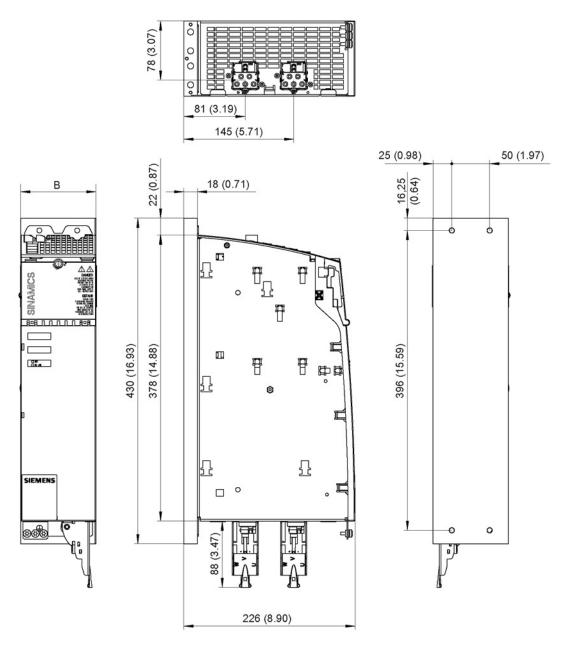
Dimension drawing of 30 A and 2 x 18 A Motor Modules Booksize with cold plate, all dimensions in mm and (inches)
